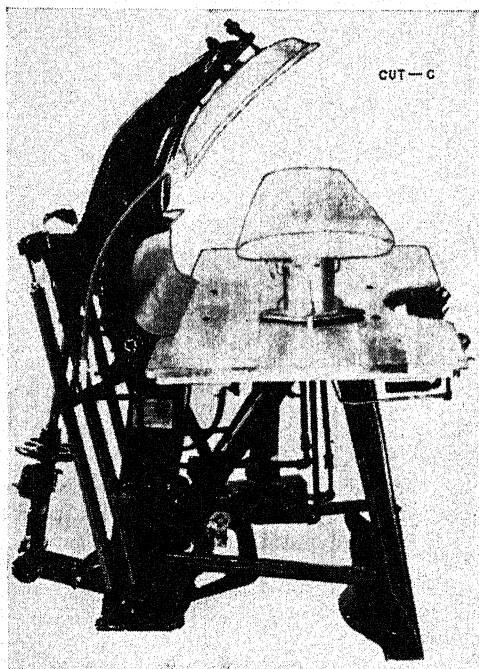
Pressing machine which preceded new arc welded steel unit.
